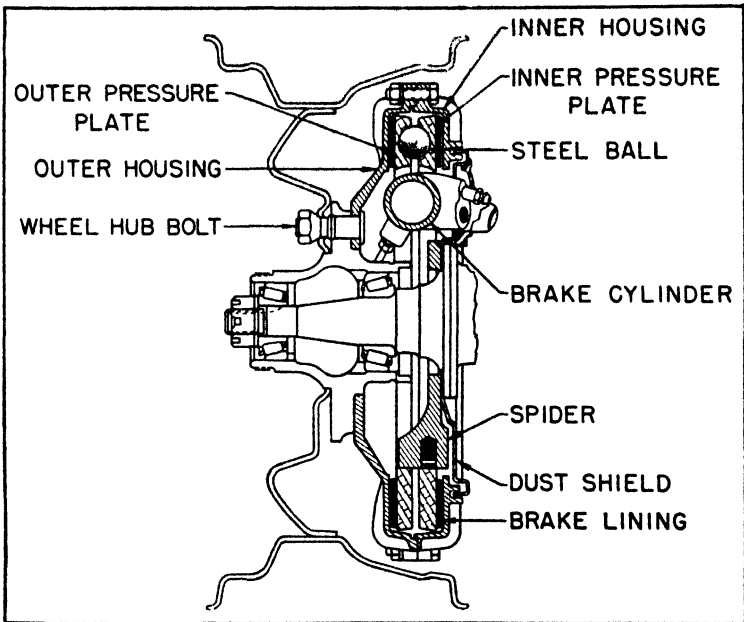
SECTION OF CHRYSLER DISC BRAKE MOUNTED ON WHEEL.
